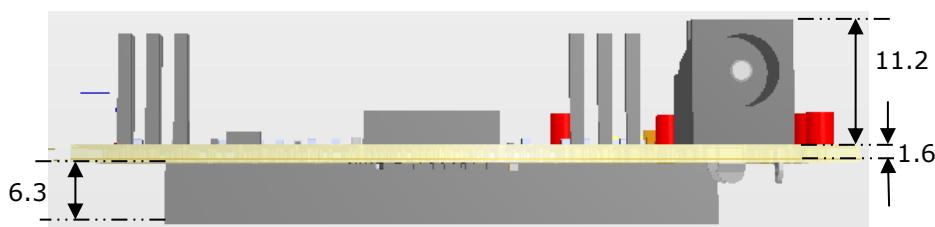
UMFT600X/UMFT601X Dimensions (Side view)
